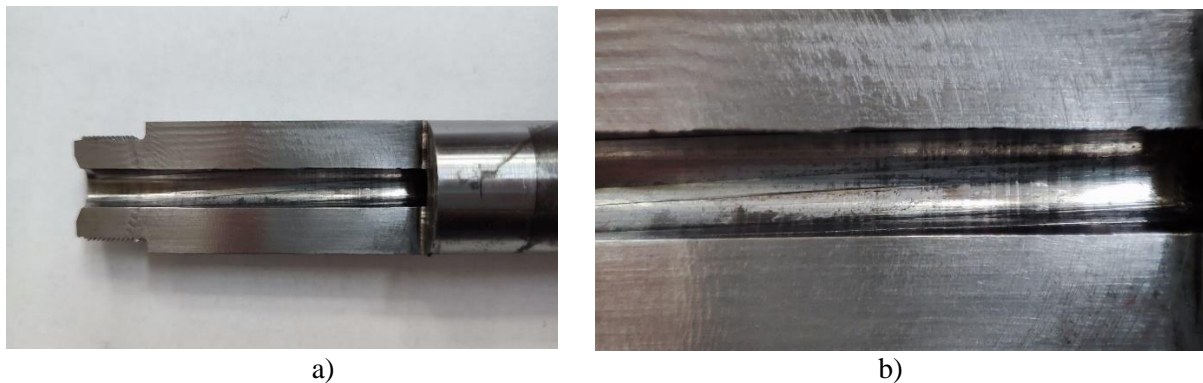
The effect without coating on the inner surface of the cylinder; a) sectional view, b) detailed view
